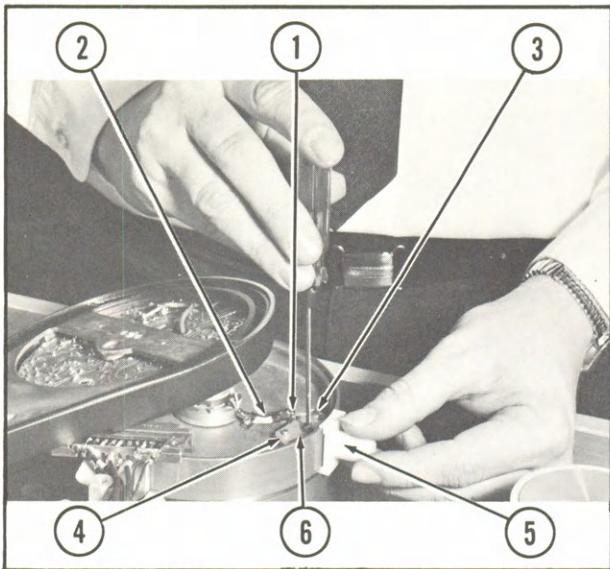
Steps for removing video head mounting plate assembly and proper position of tip projection tool.
